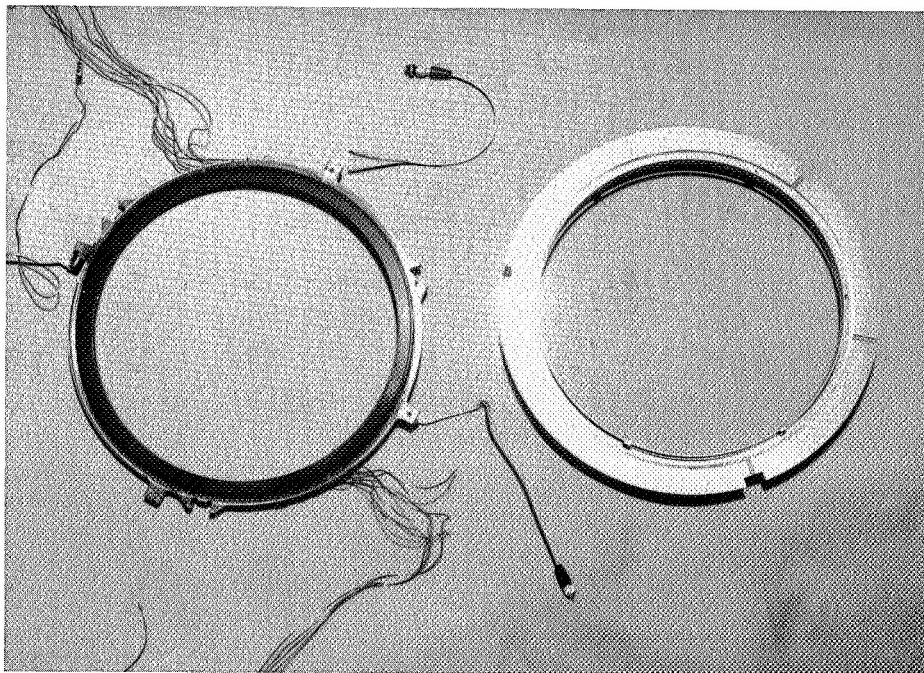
Rear Side of Carbon and Front of Carrier After Dynamic Testing of Build 2 of the Oil-Film Seal (XP-94853)
